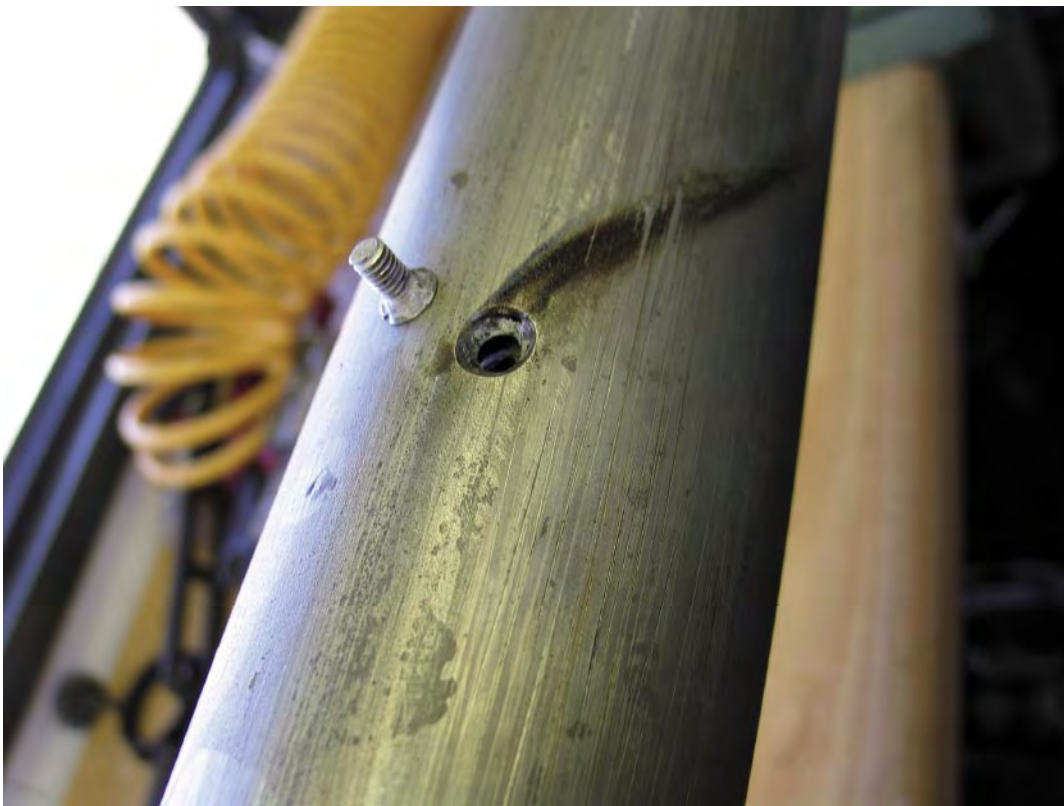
Pipes with crevice corrosion inside the chemical analysing equipment.
